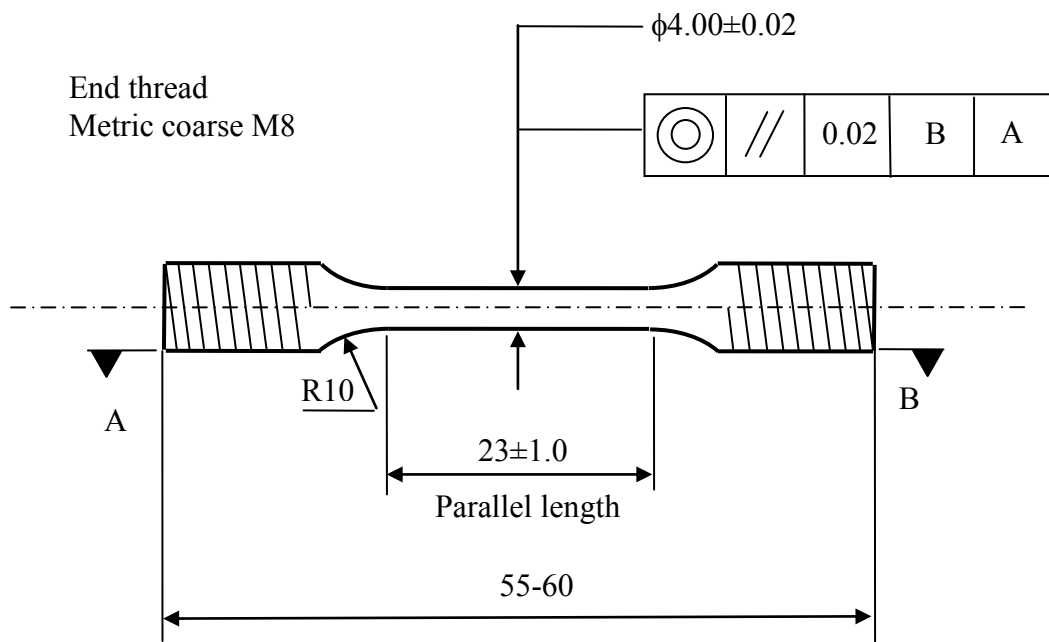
Drawing for plain tensile test pieces with roughness value for machined surfaces to be 1.6 micrometers and all dimensions and tolerances are in mm
